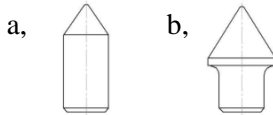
Cylindrical alloy cutting head (1.2a) and mushroom-shaped alloy cutting head (1.2b)
